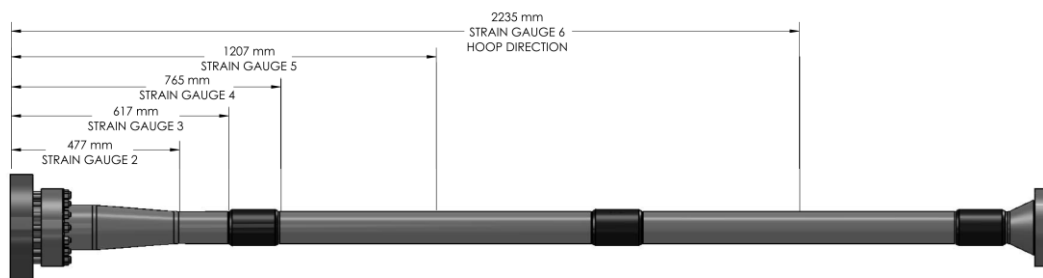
Strain gauge placement on prototype MSJ
